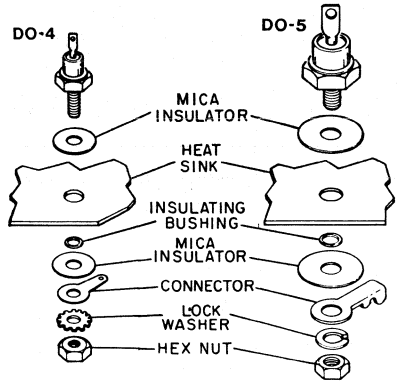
Suggested mounting arrangements for DO-4 and DO-5 packages.
